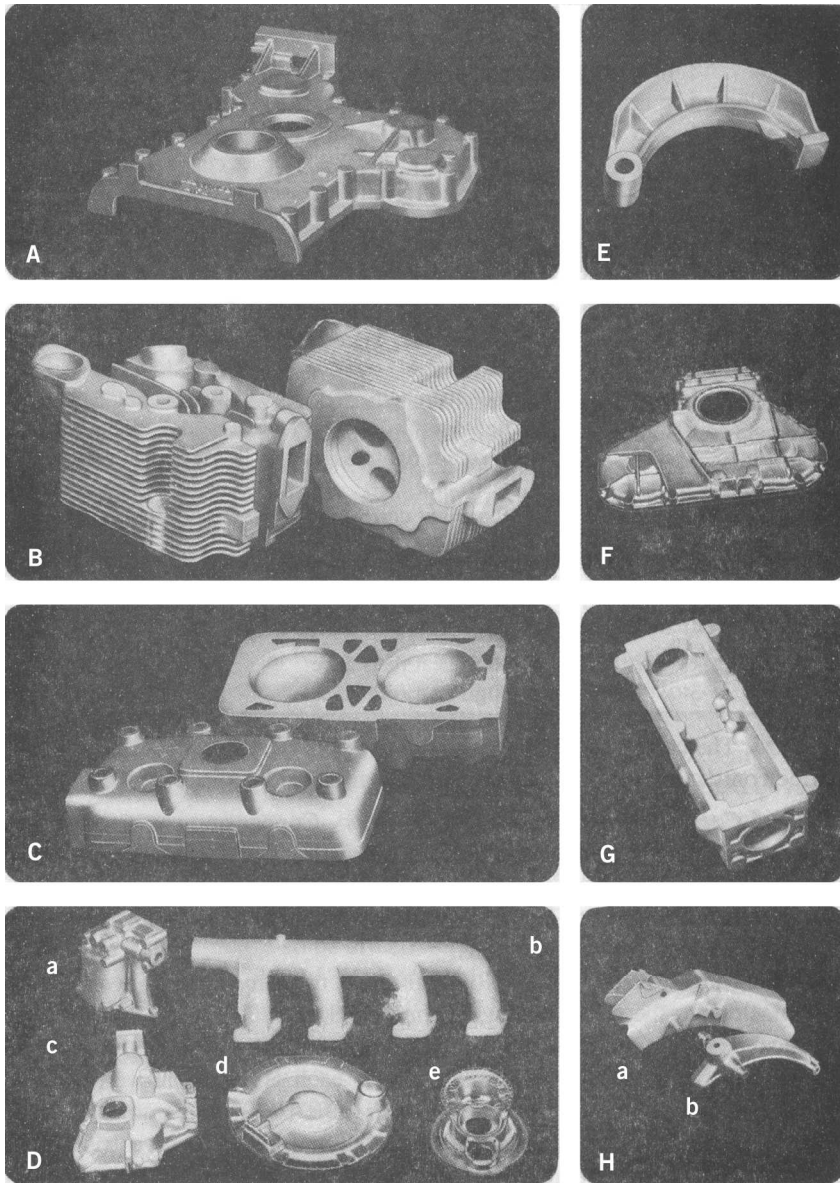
Aluminium alloy castings (A) Gear cover, 5.8 kg (B) Cylinder head, 4.95 kg (C) Cylinder head, 3.3 kg (D) (a) Oilpan screen case, 2.47 kg (b) Induction pipe, 3.87 kg (c) Gearbox case, 1.83 kg (d) Cover for oil sump, 2.58 kg (e) Gear part, 2.87 kg (E) Brake block, 3.6 kg (F) Case cover, 4.0 kg (G) Injection case (lower part), 1.8 kg (H) (a) Saddle support, 3.65 kg (b) Front-wheel rocker, 2.9 kg
